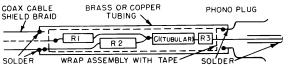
I-F INJECTION PLUG CONSTRUCTION
